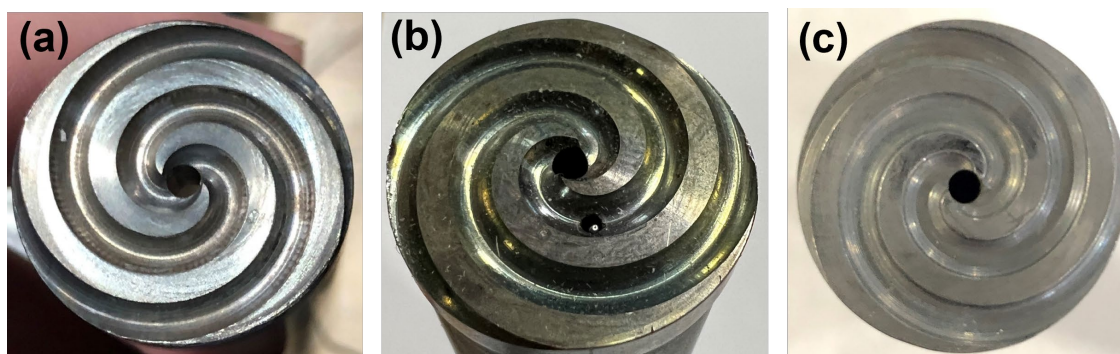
Scrolled die faces before friction extrusion process: (a) MP159 after heat treatment and then machined, (b) MP159 after machine and then heat treatment, and (c) W-Re die.
